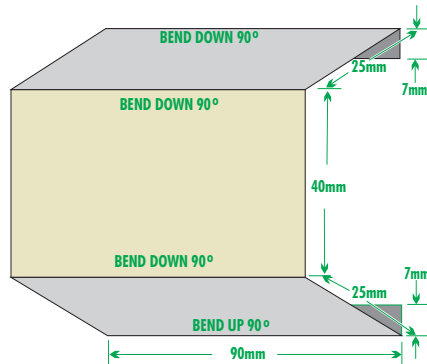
the detail for the insulating shield over the mains outlet sockets. It secures under the outlet backs.
